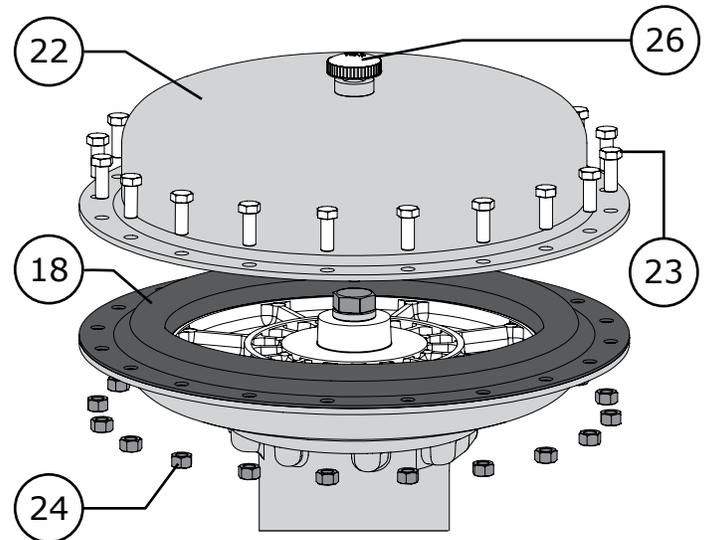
Upper Diaphragm Casing Disassembly Steps 1 & 2
